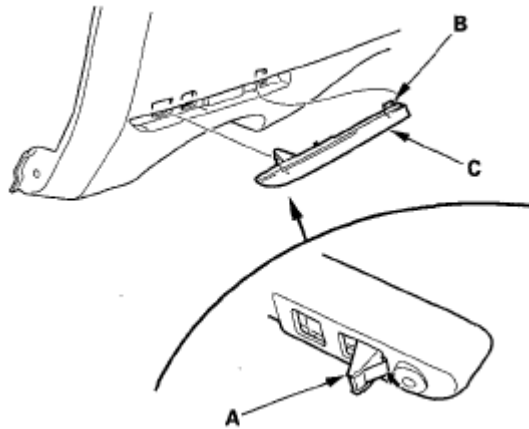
Identifying Rear Bumper Reflector Clip And Hook
